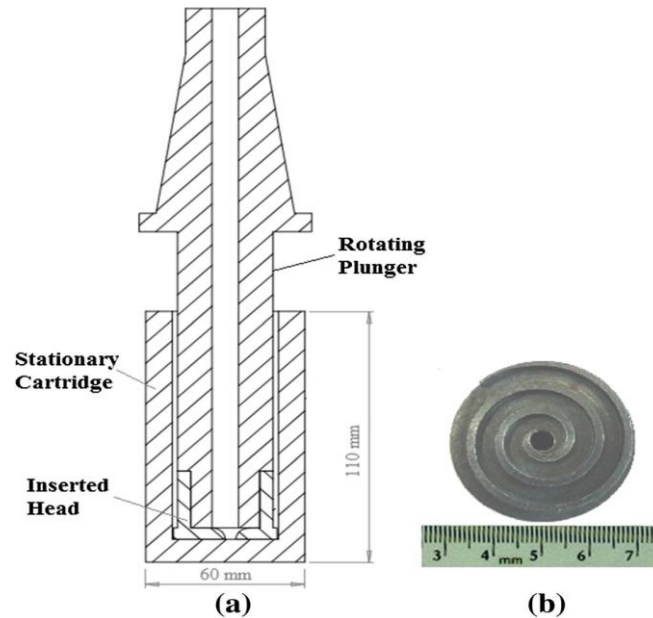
(a) Schematic representation of process apparatus, (b) scrolled face inserted head [52].
